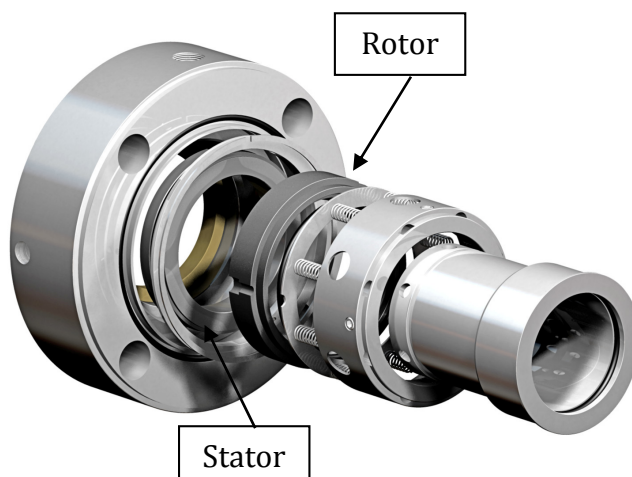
Exploded manufactured assembly view of the pressure vessel and mechanical seal assembly
